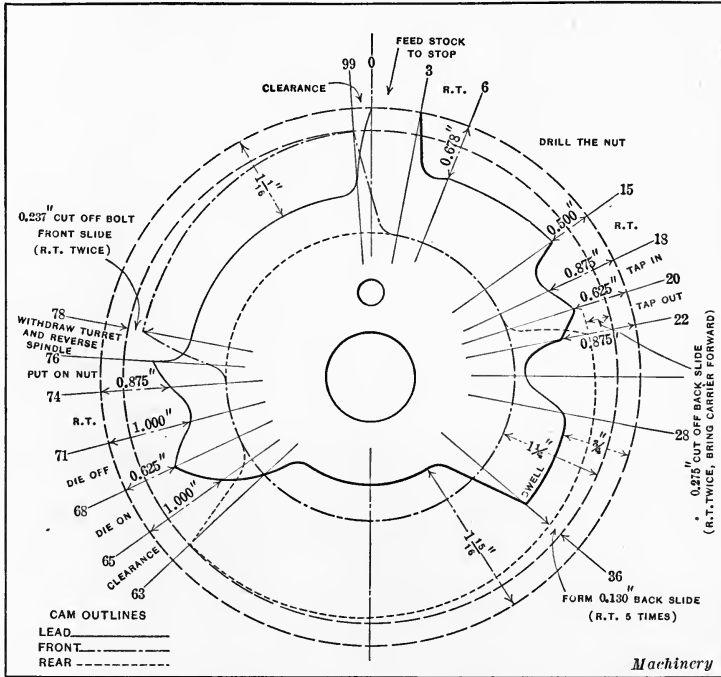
Cams used for Making and Assembling Nuts and Bolts
